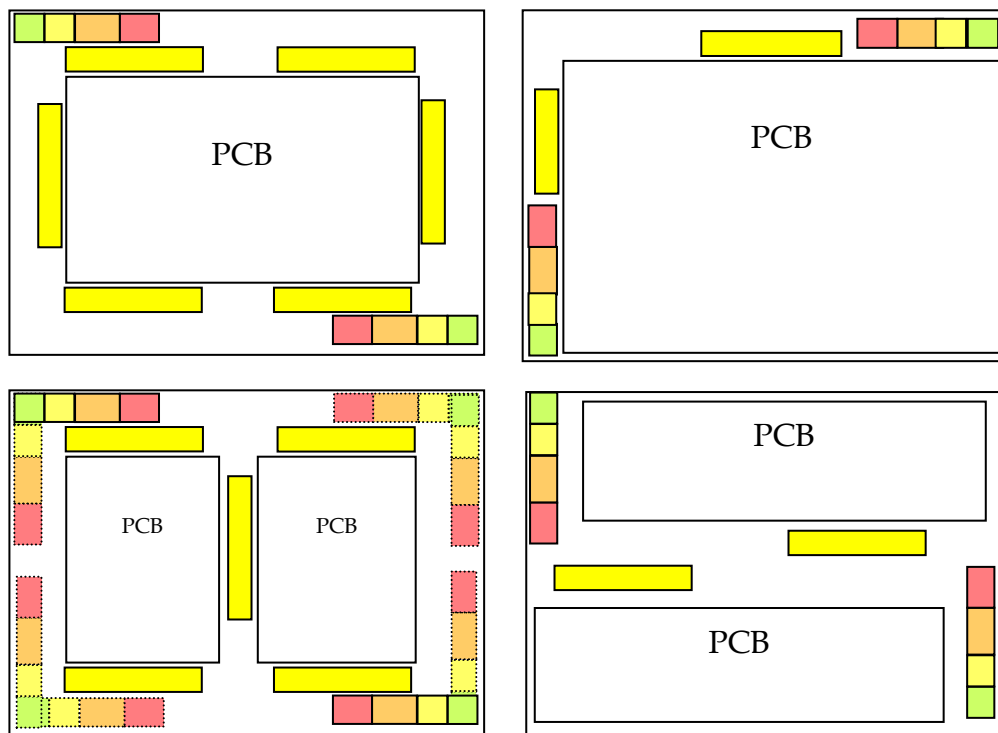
Example of placement of coupons and PCB in usable area of manufacturing panel
